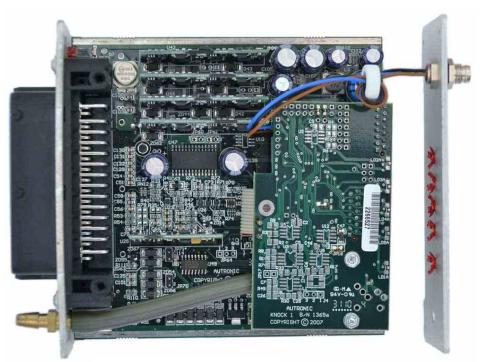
Knock Processor Board installed on SM4 ECU (same for SM3) 2.3.1 The Knock Processor mounting method for SM4 and SM3 ECUs is the same as that used for the Plug-in ECUs. Take note of the sensor wiring and toroid filter core positioning during installation (see Fig 7).
